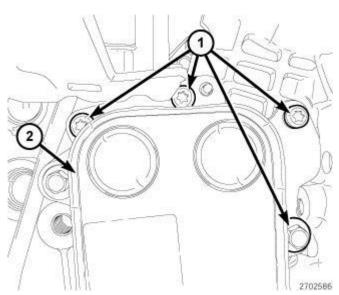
Engine Oil Cooler & Bolts Courtesy of CHRYSLER LLC
